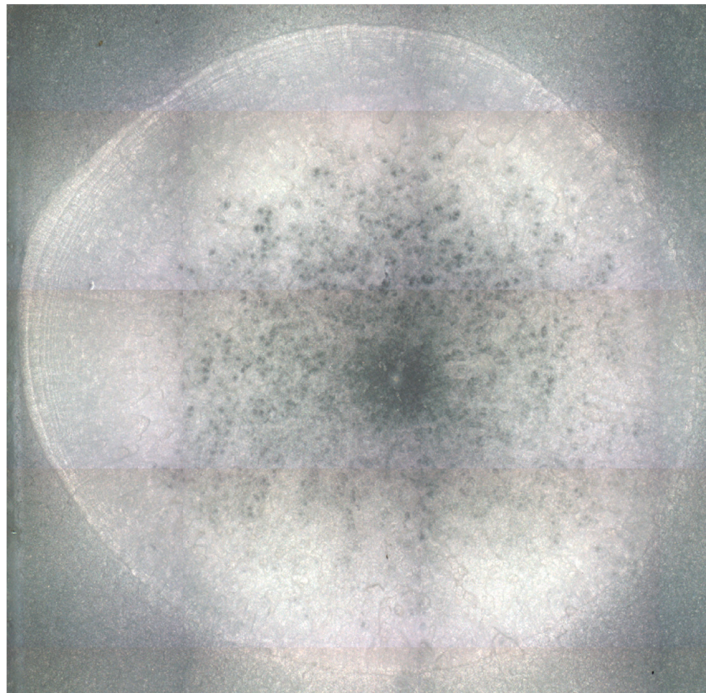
Fatigue fracture in a POM tensile specimen.
